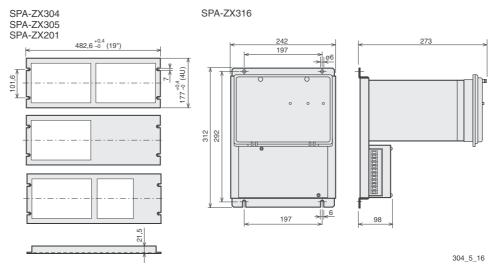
Mounting cabinets and frames as well as projecting mounting (dimensions in mm)
